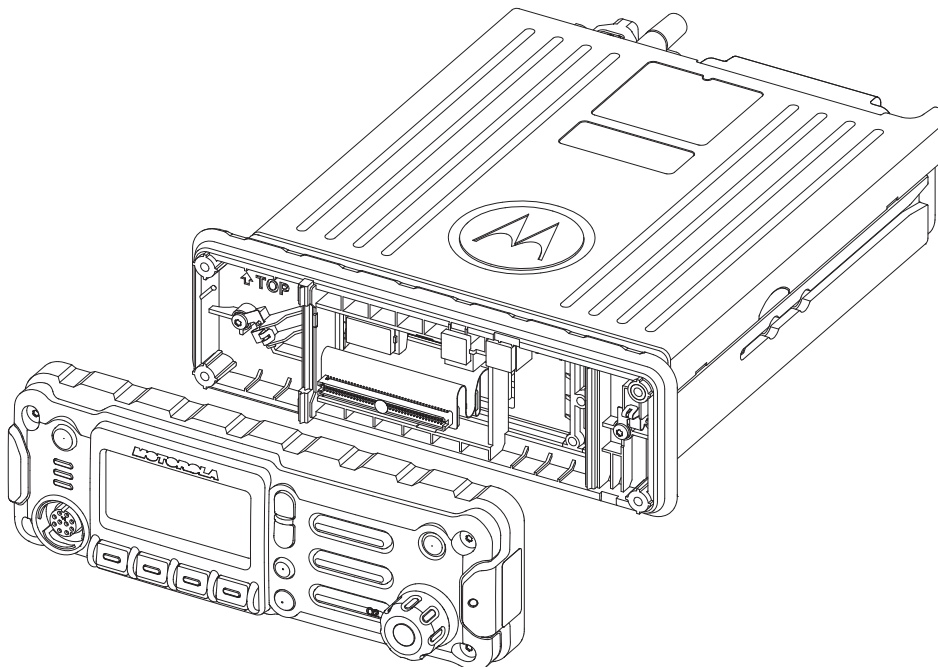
Installing the Transceiver Flex onto the Front Housing Assembly
